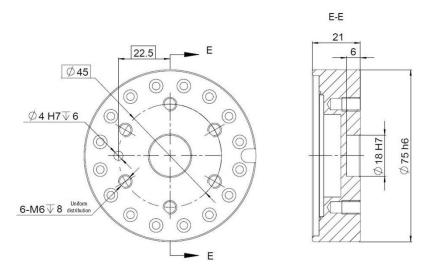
AIR35-2700/AIR20-3100 wrist flange dimensions
